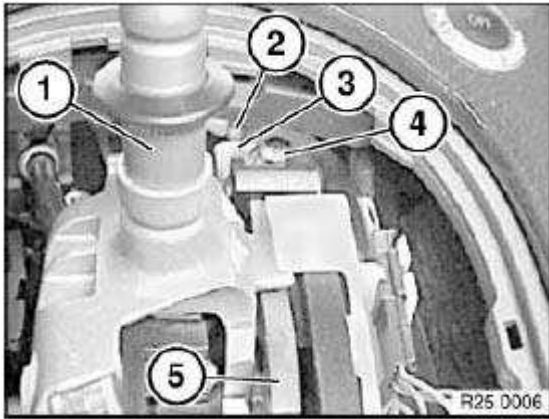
Selector Lever, Cable, Holder, Screw And Locking Pawl
